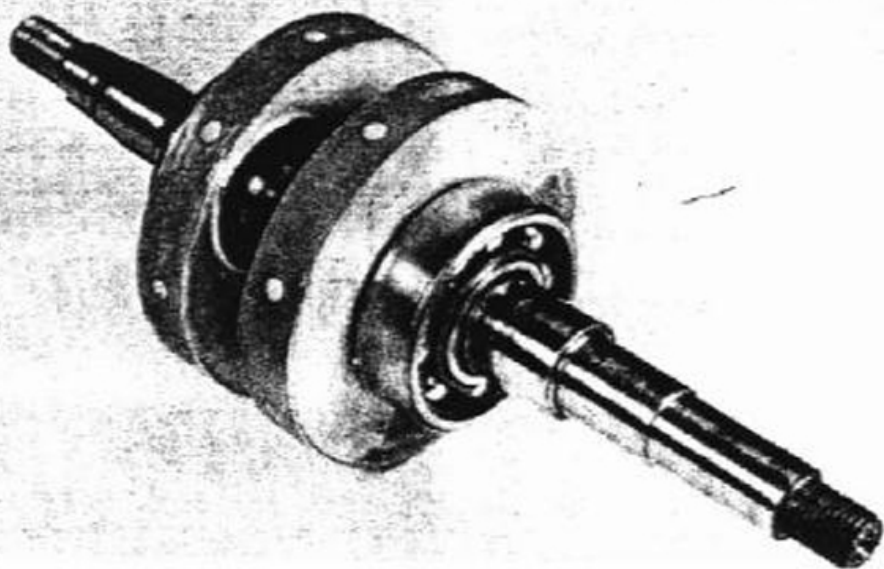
Crankshaft centering tool fits the bore and the stub indicates location of crank journal. Proper alignment is important!
